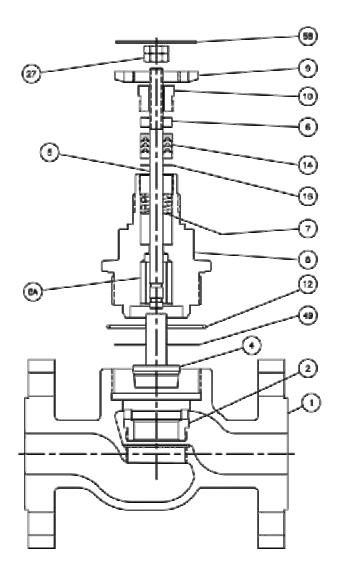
Valve Body Assembly Shown with Standard PTFE Spring Loaded Packing
